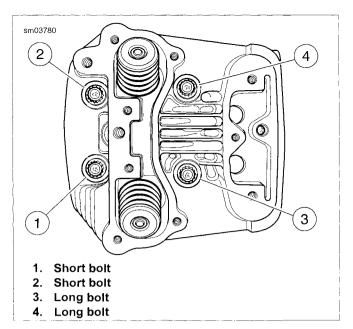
Rear Cylinder Head Screw Loosening/Tightening Sequence (typical)
